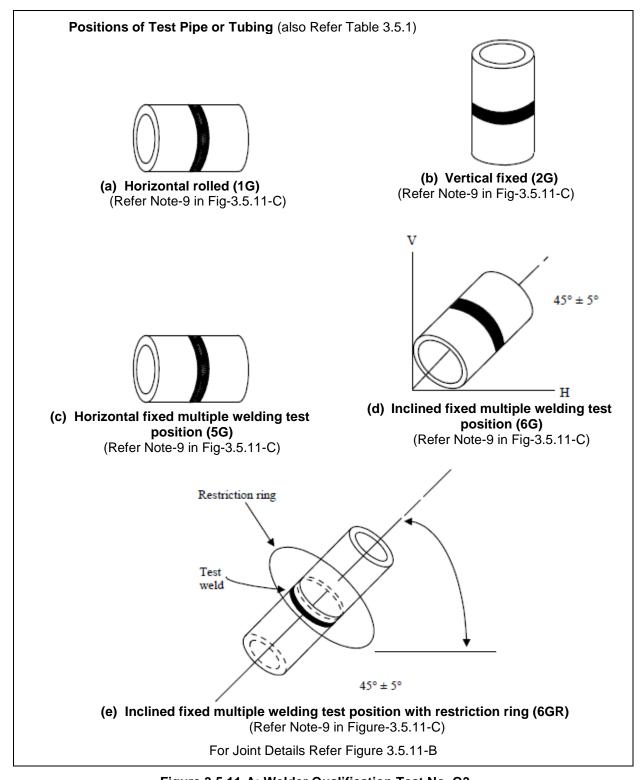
A: Welder Qualification Test No. Q3
